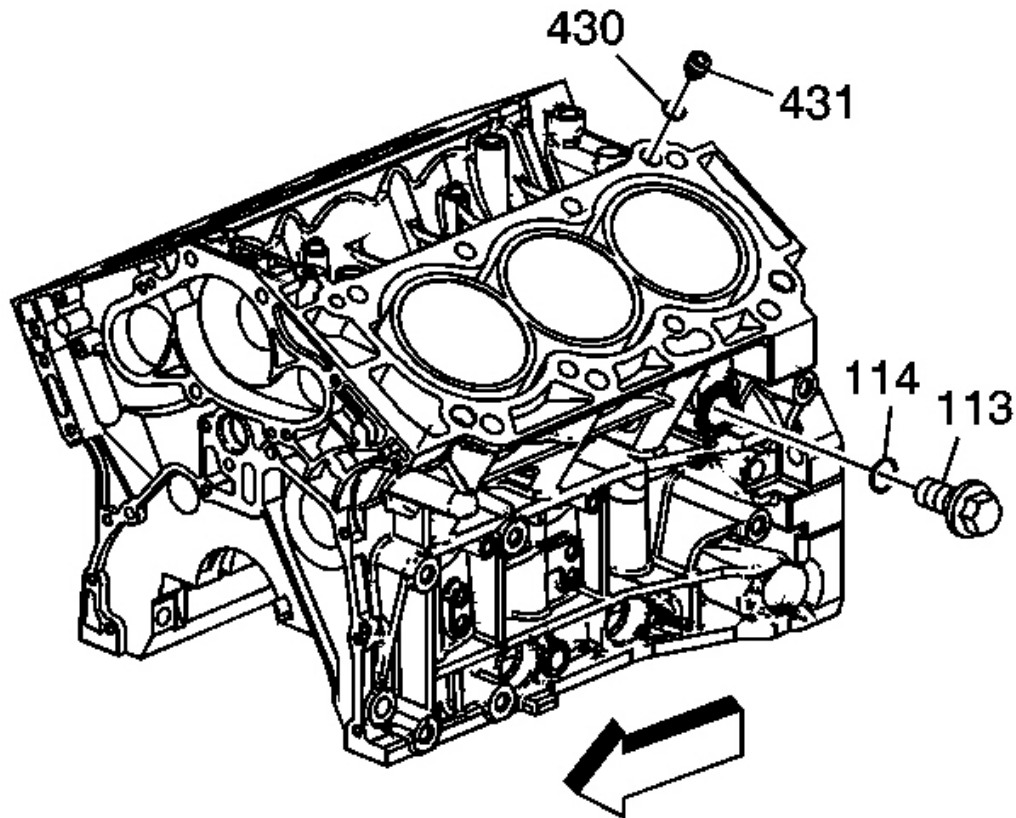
View Of Coolant Drain Plug, Washer, Restrictor & O-Ring
